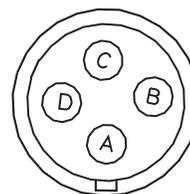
Alternator-to-Regulator 4-Socket Harness Plug
